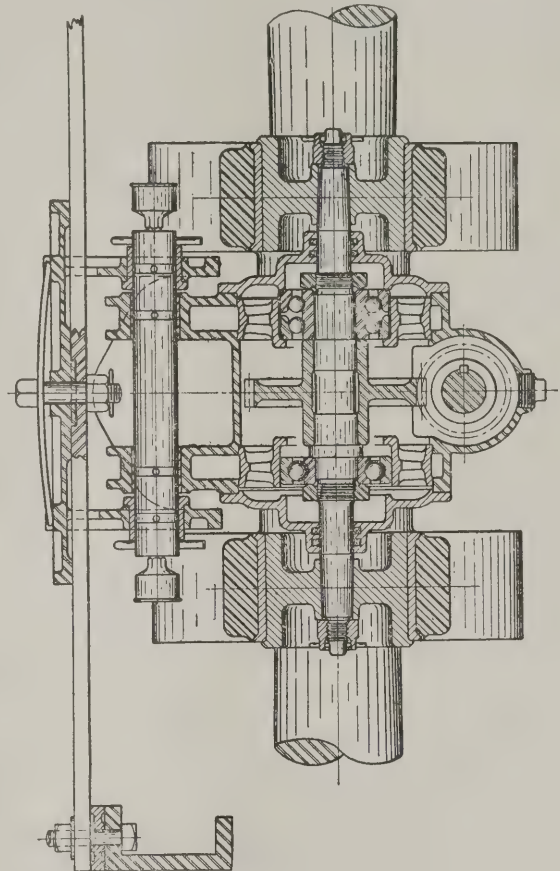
Section Showing Details of Construction of U. S. L. Drive
